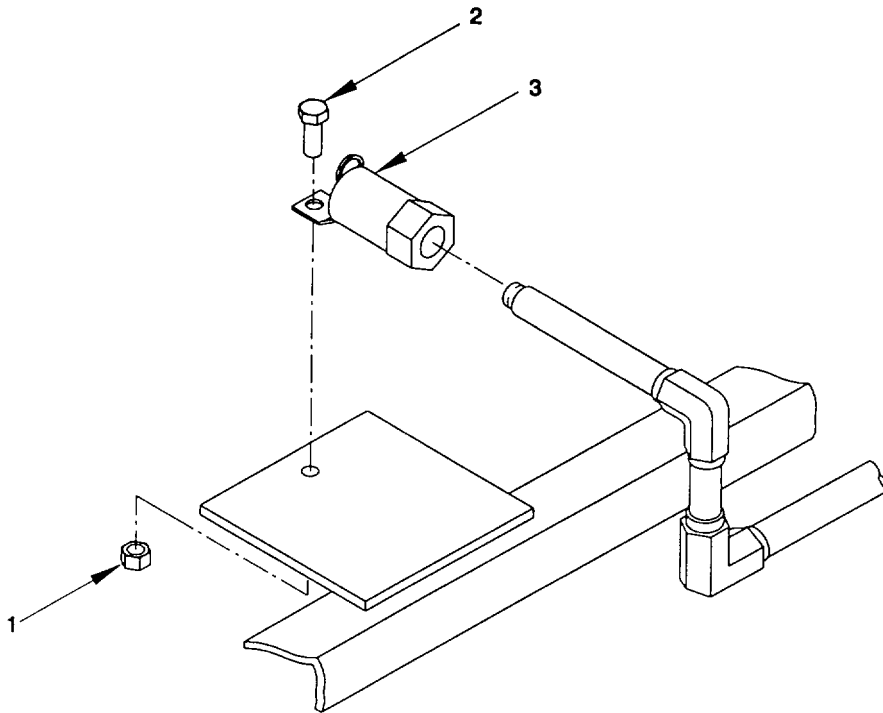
Pressure Operated Trip Mechanism, Fire Suppression System, Remove/Install.
